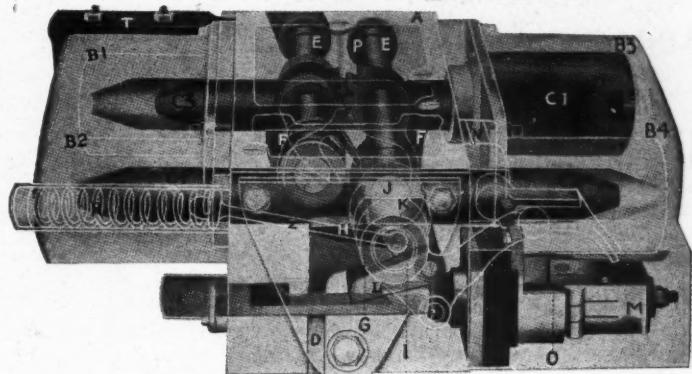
Phantom view of Cutler-Hammer electric gearshift
